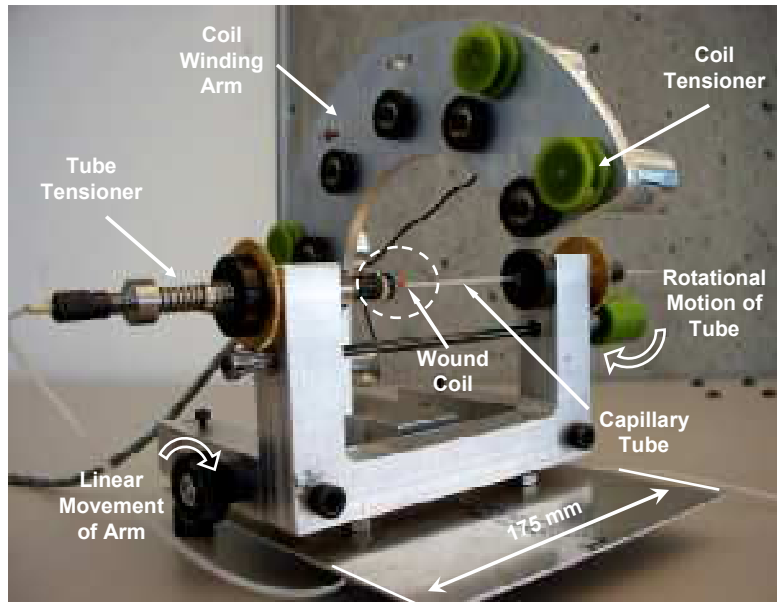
Coil winding machine capable of winding 20 μm wires onto 100 μm micro capillary tubes.
